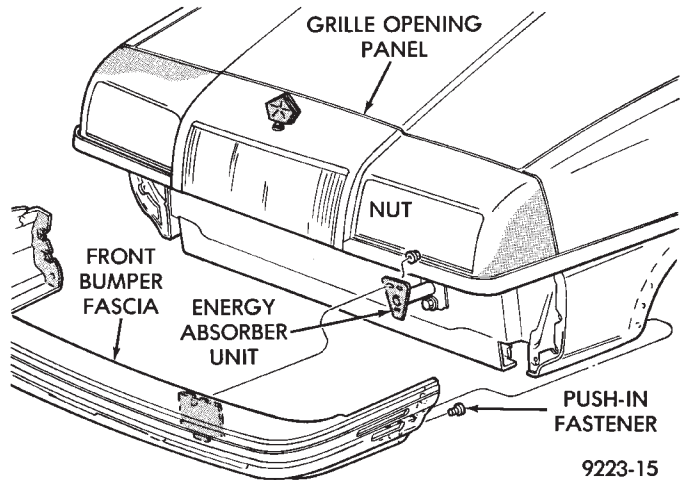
Front Bumper and Fascia—AY/P-Body
